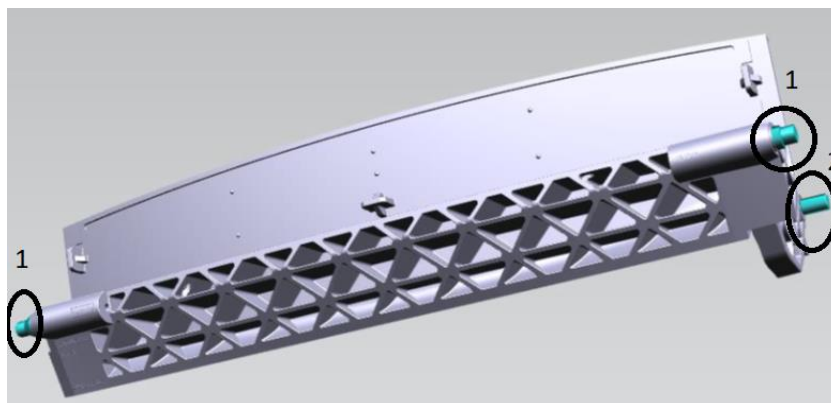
The combiner support pins 1- Rotation pins 2- Guiding pin
